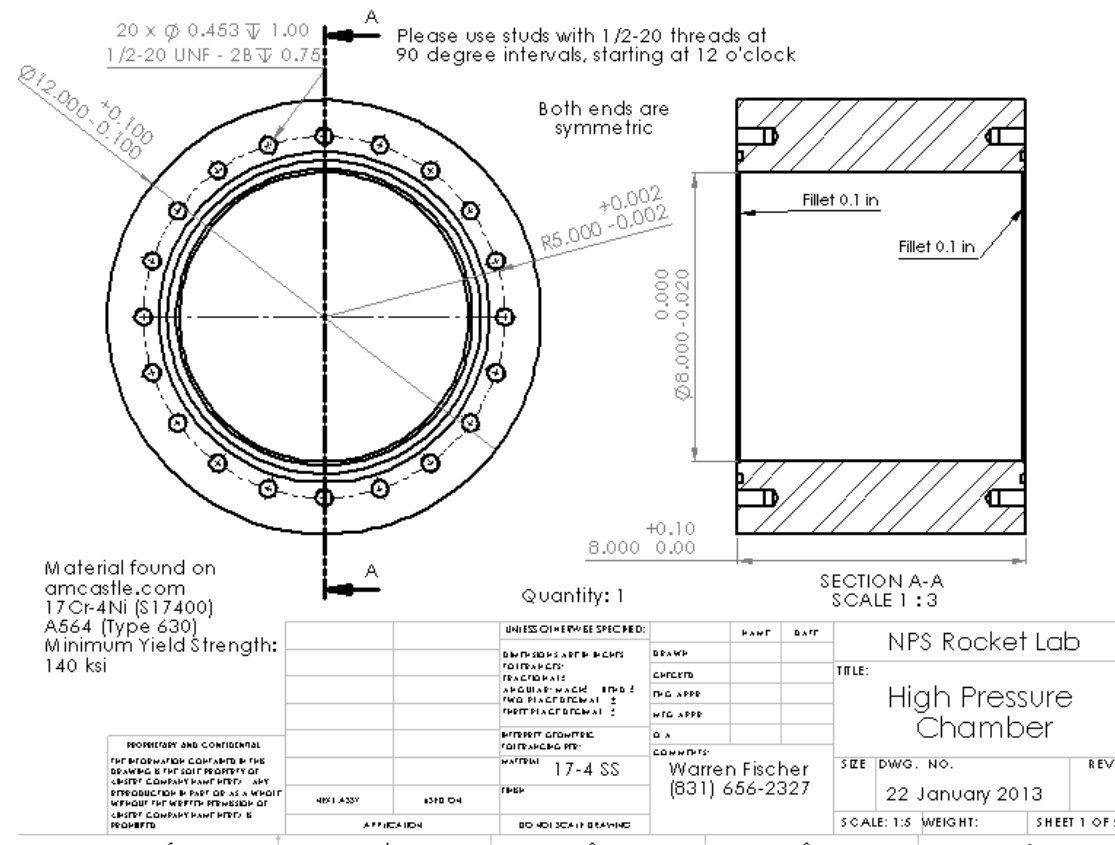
High Pressure Chamber Fabrication Drawing (View 1 of 2)
